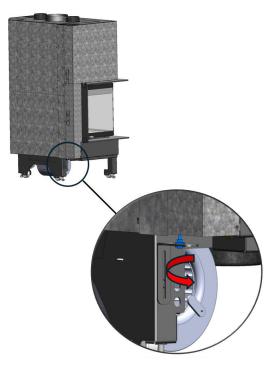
Access to remove the bolts securing the Izaro CLI counterweights.
